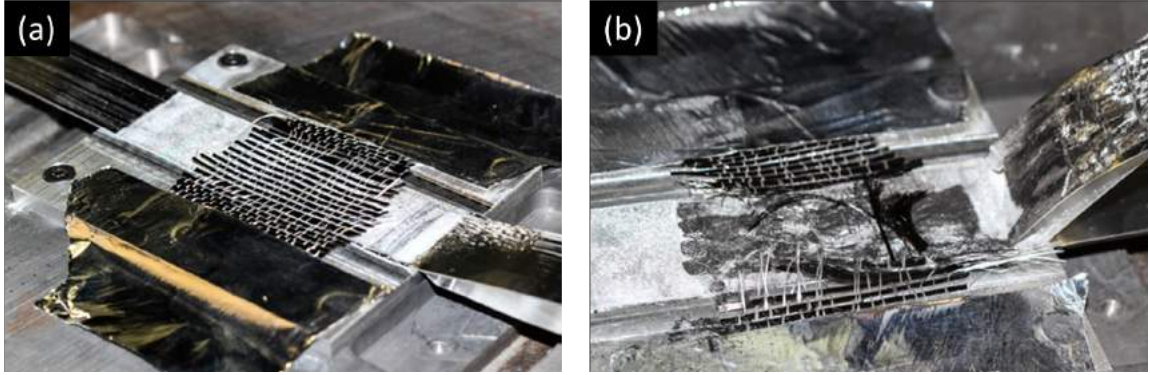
Unidirectional CF fabric embedding attempt with fibers parallel to tape feed. (a) Before welding, (b) After welding attempt.
